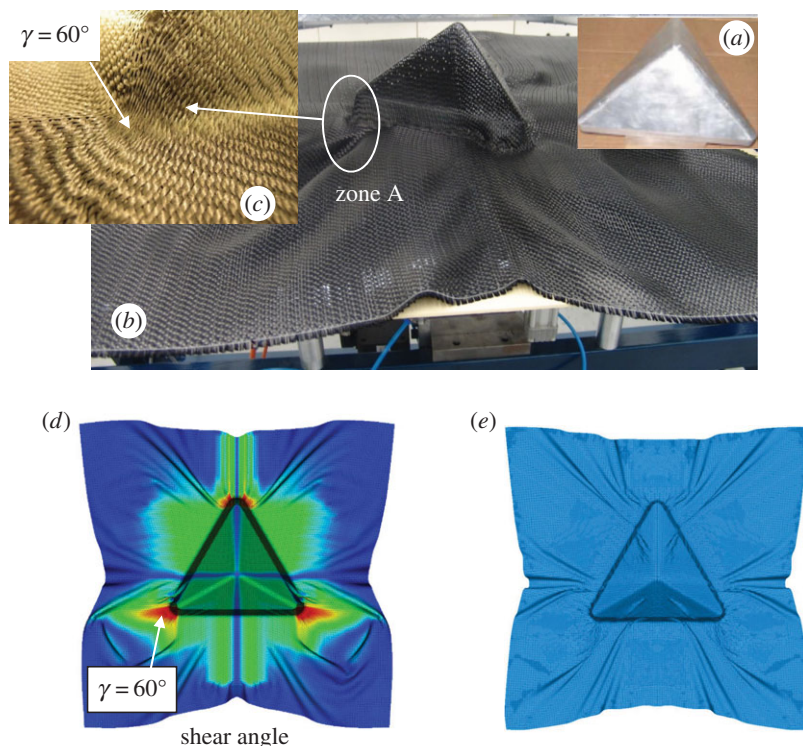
Forming of a tetrahedral shape: (a) tetrahedral punch, (b) shaped preform, (c) 60° shear angle in a corner, (d) forming simulation and (e) forming simulation with a low blank holder load.
